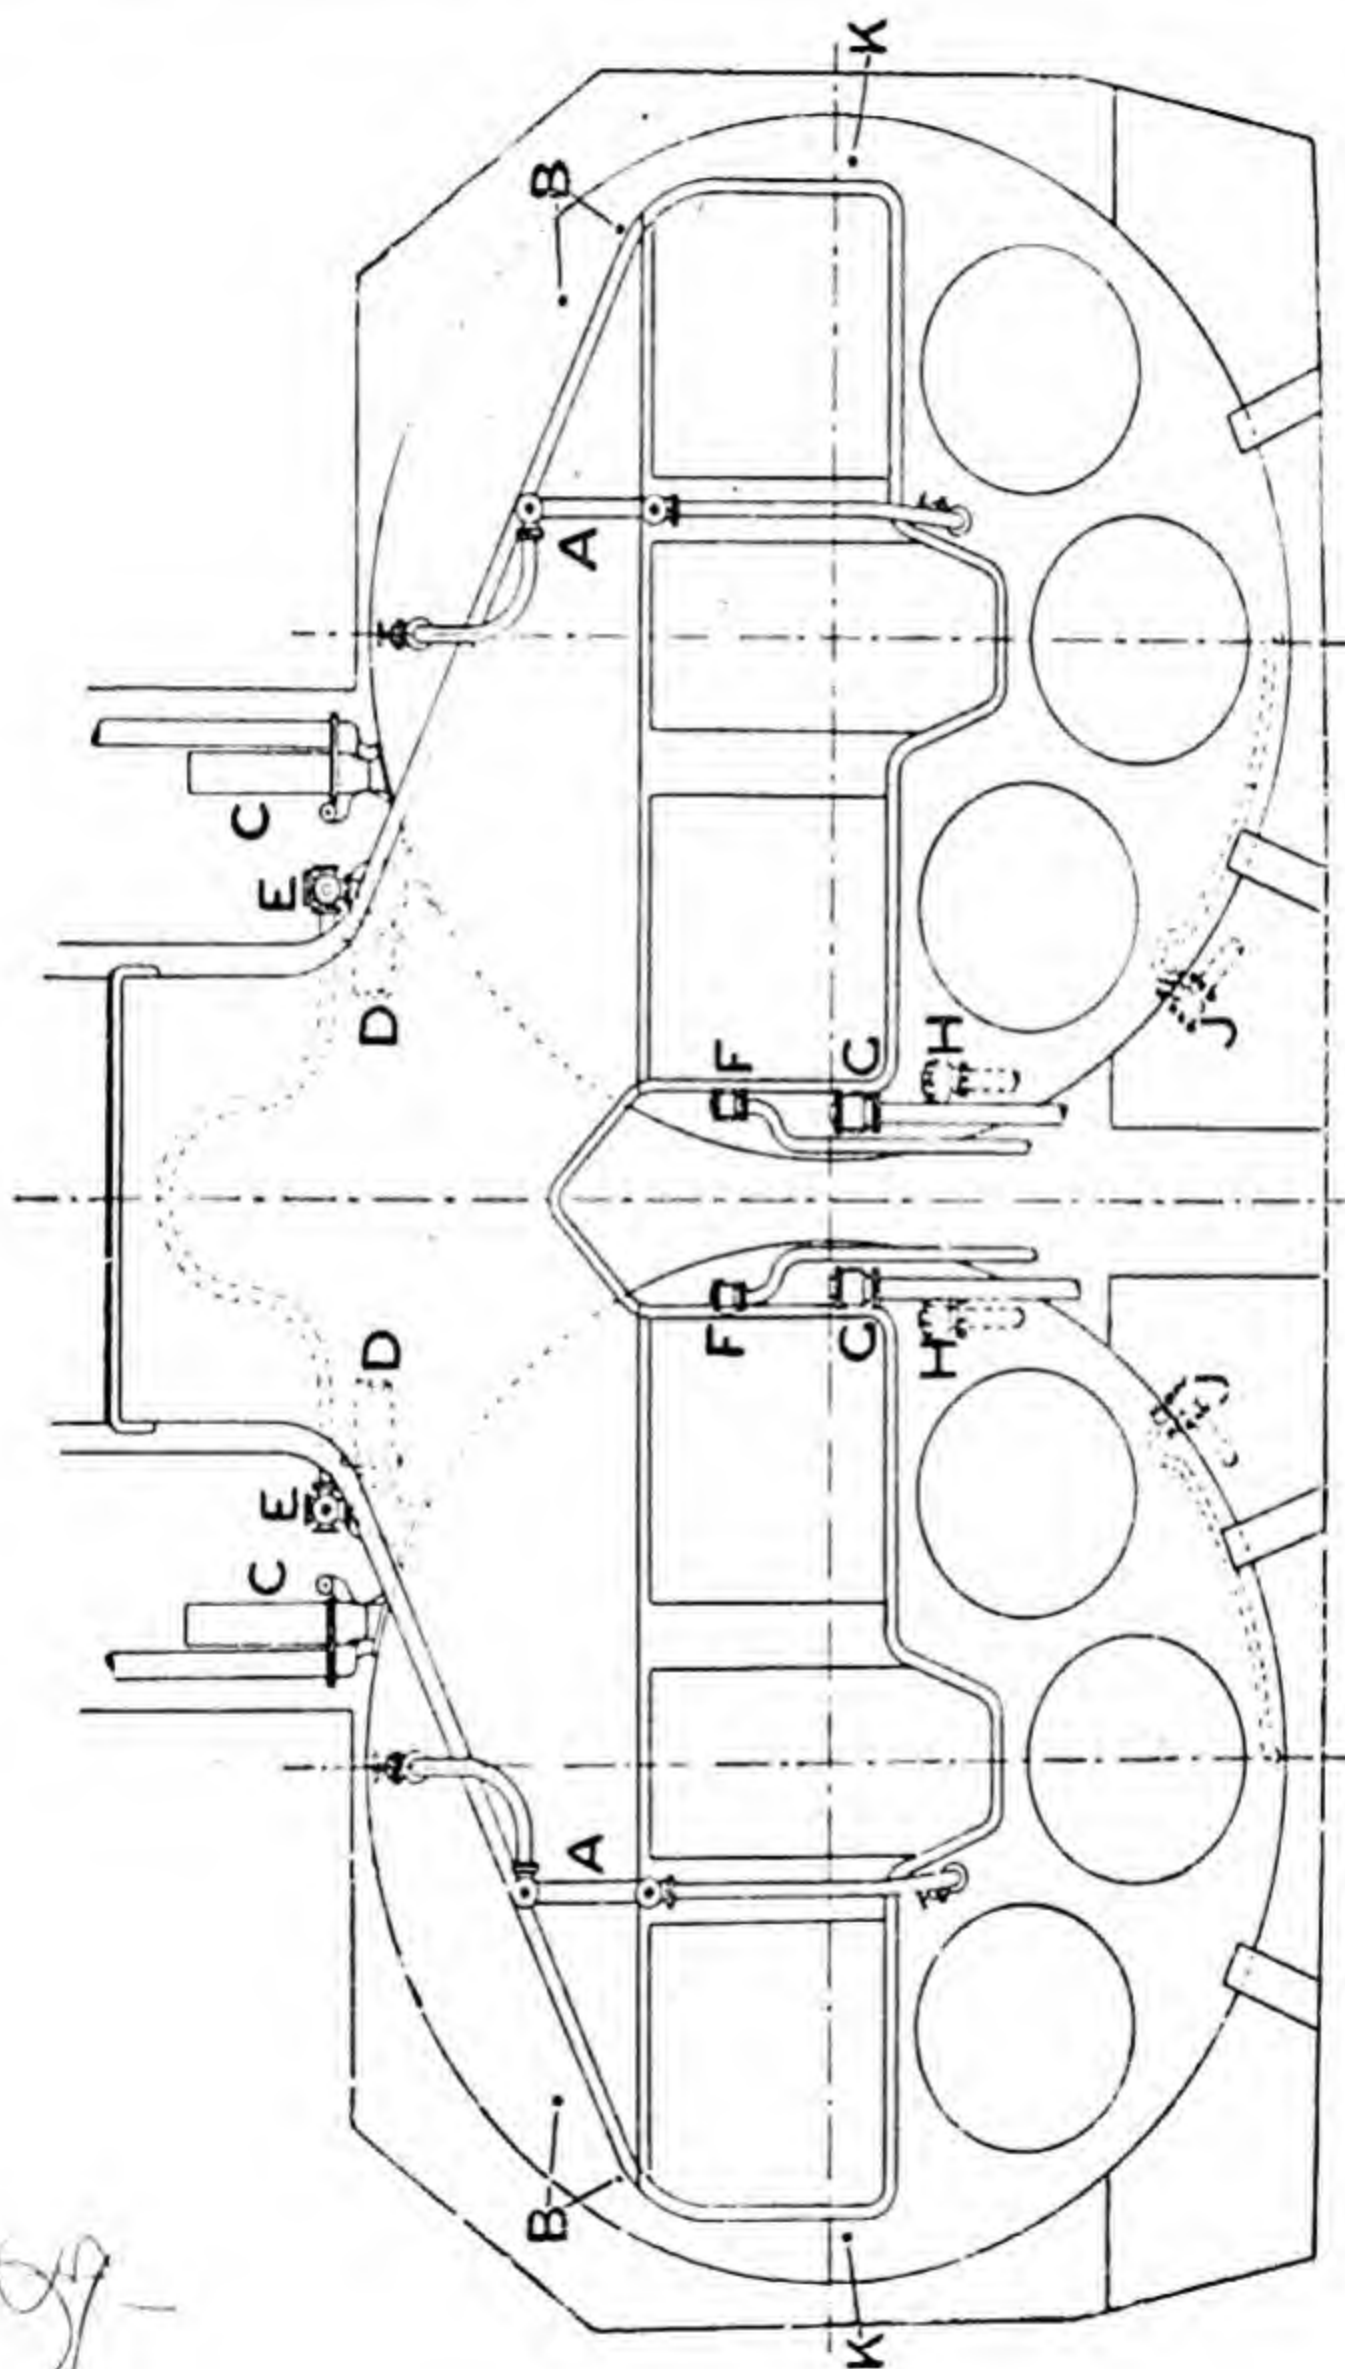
View, looking forward, of two marine boilers mounted in position on board ship.
